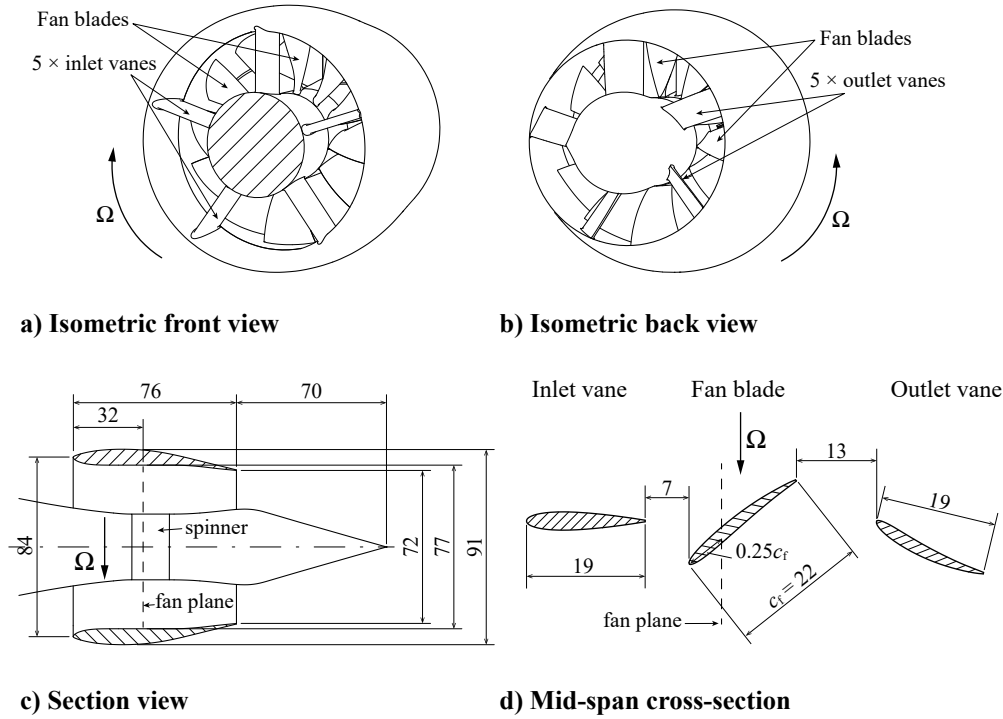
Details of the shrouded BLI propulsor equipping the wind-tunnel model (dimensions in mm).
